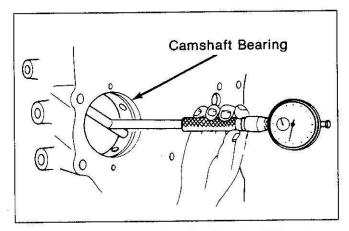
Measuring the Camshaft Bearing Inside Diameter
